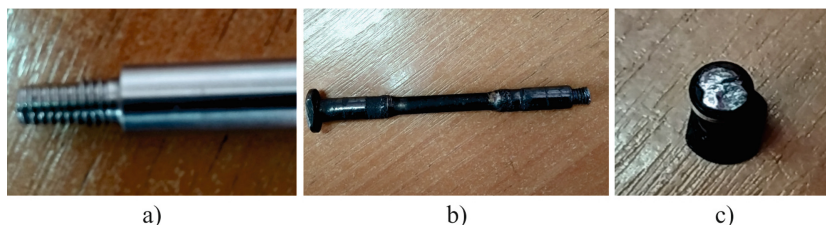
General view of the surfaces of the fasteners of the aircraft engine: a) the surface of the part that has not been used; b) the surface of detail, after the exploitation with traces of various damages; c) the fracture surface of the threaded connection.
